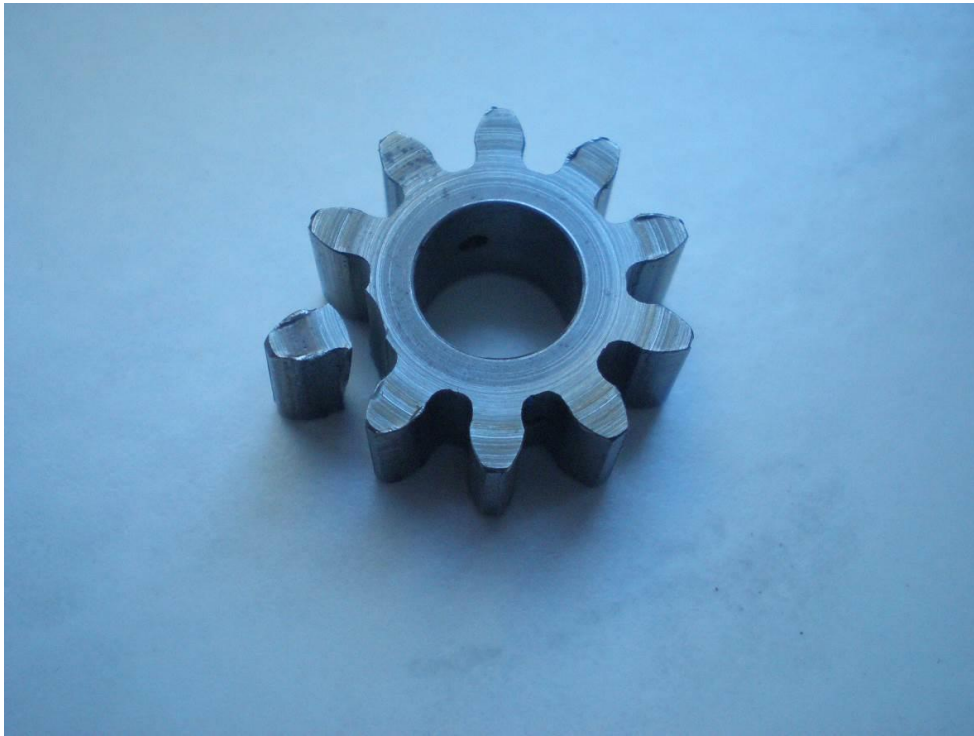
The damaged p/n Sc3755 gearwheel with a broken off tooth.
